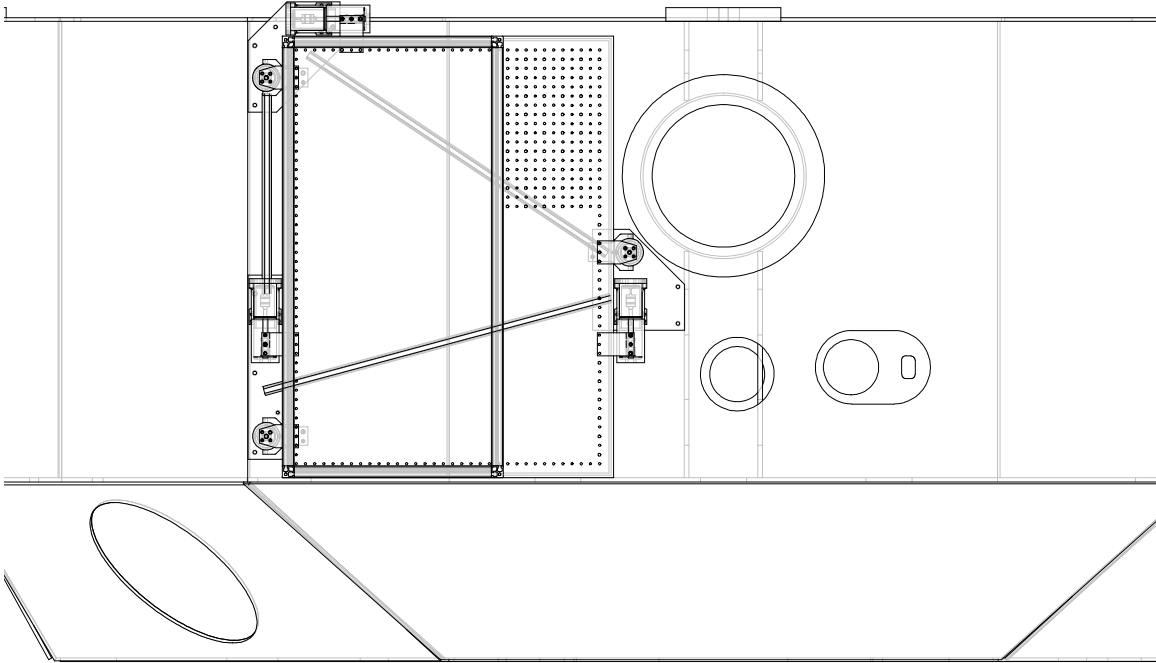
Plan view of laser bench on back port, showing intended flexure mounting locations.
